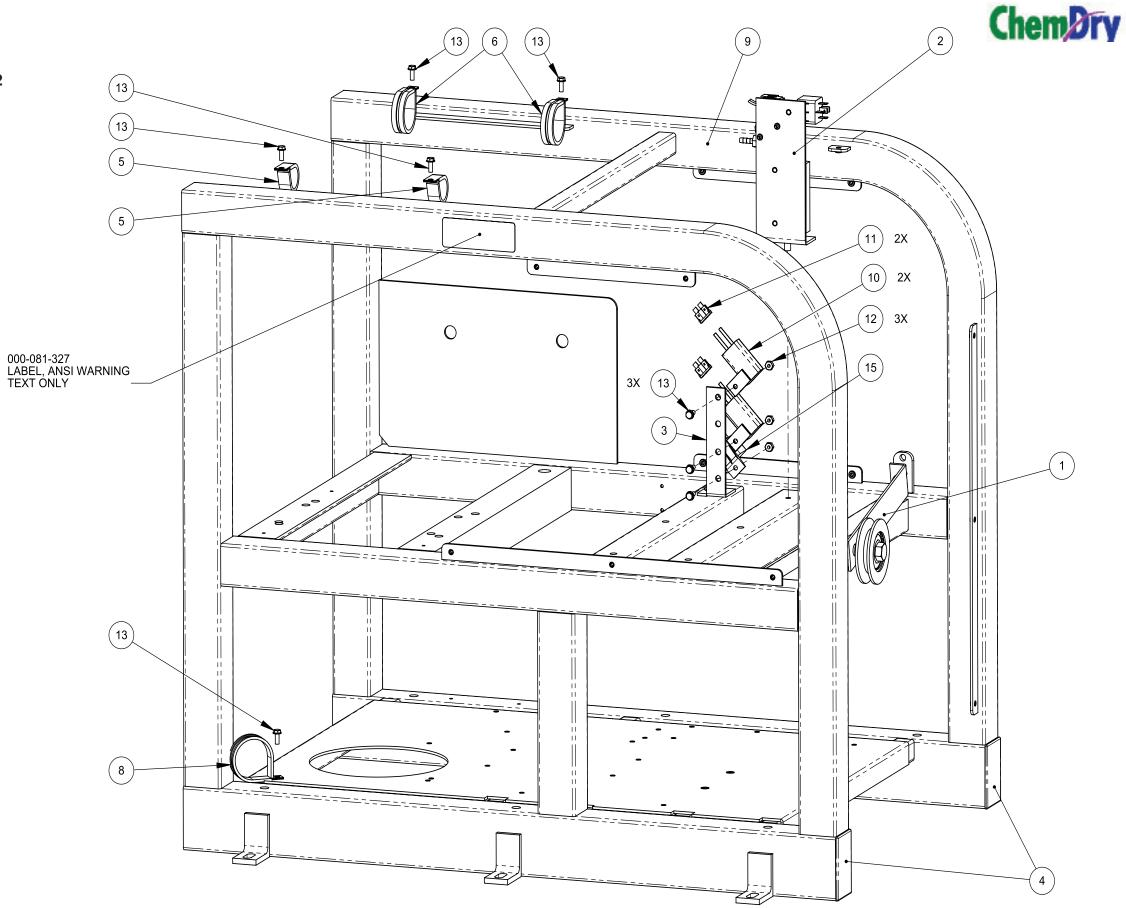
Frame Assembly - View 2 of 2 610-001-747 Rev. B
